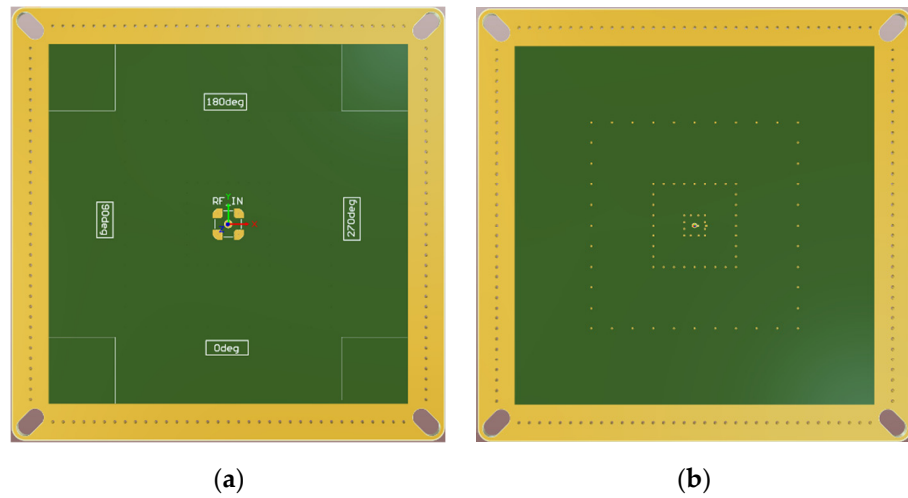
Test PCB blank: (a) top view (b) bottom view.
